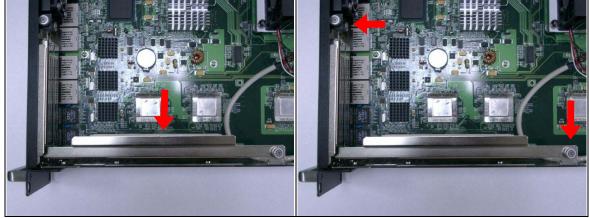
PCI-X Riser card on the back of PPAP-3723L
